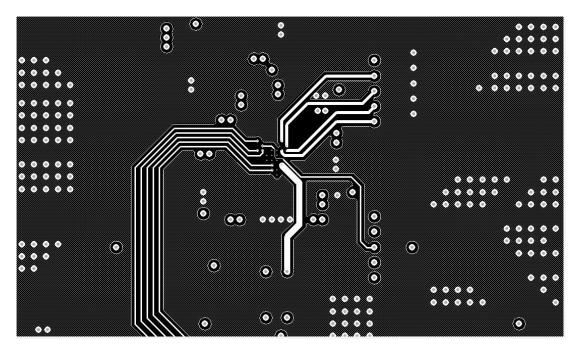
BD71815AGW Reference Board Breakout (Layer 6)
